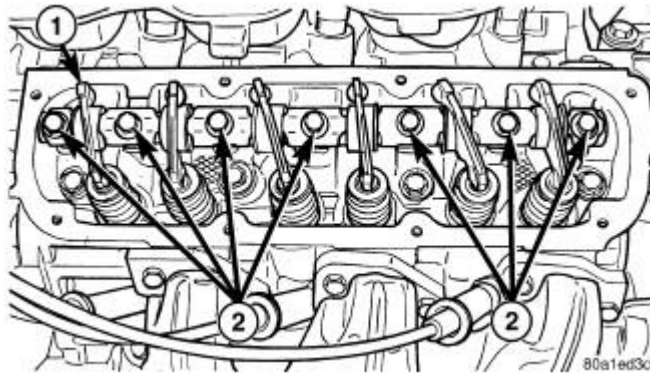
Rocker Arms, Shaft Assembly & Bolts
